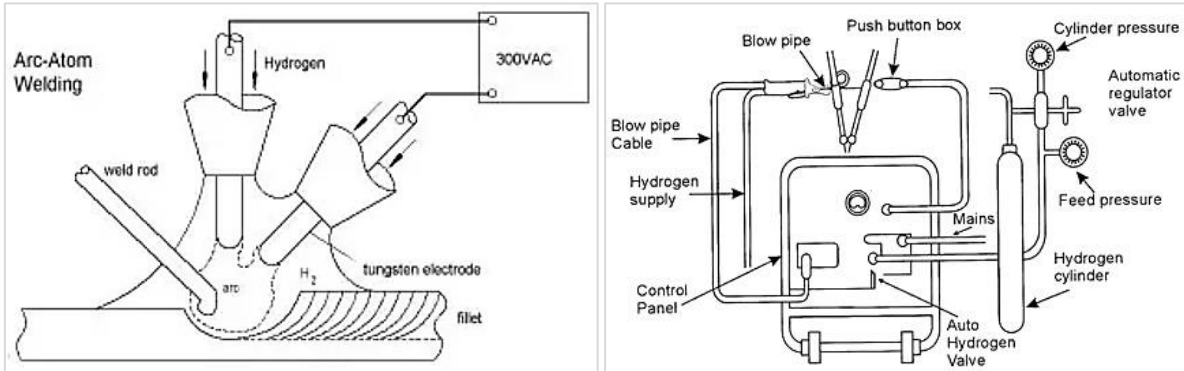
Left: Atomic hydrogen welding explaining diagram. Right: Atomic Hydrogen Welding Equipment. (1)
